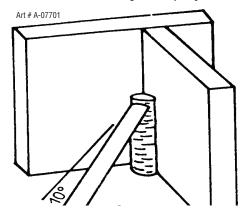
Single Run Vertical Fillet Weld
